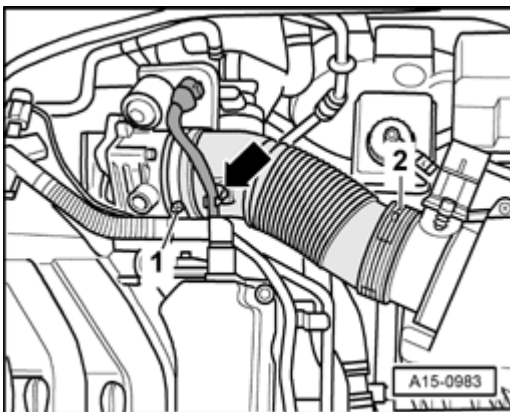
Loosening Hose Clamps And Removing Air Hose Between Air Cleaner Housing & Throttle Valve Control Module -J338-
